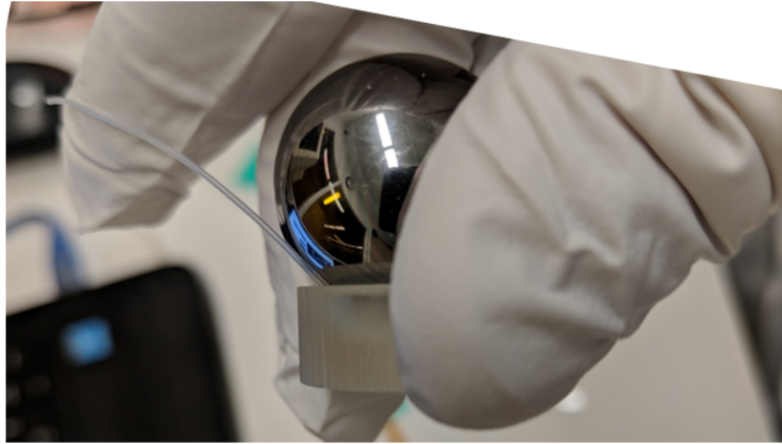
Steel ball on mold with tube sticking out through the notch.
